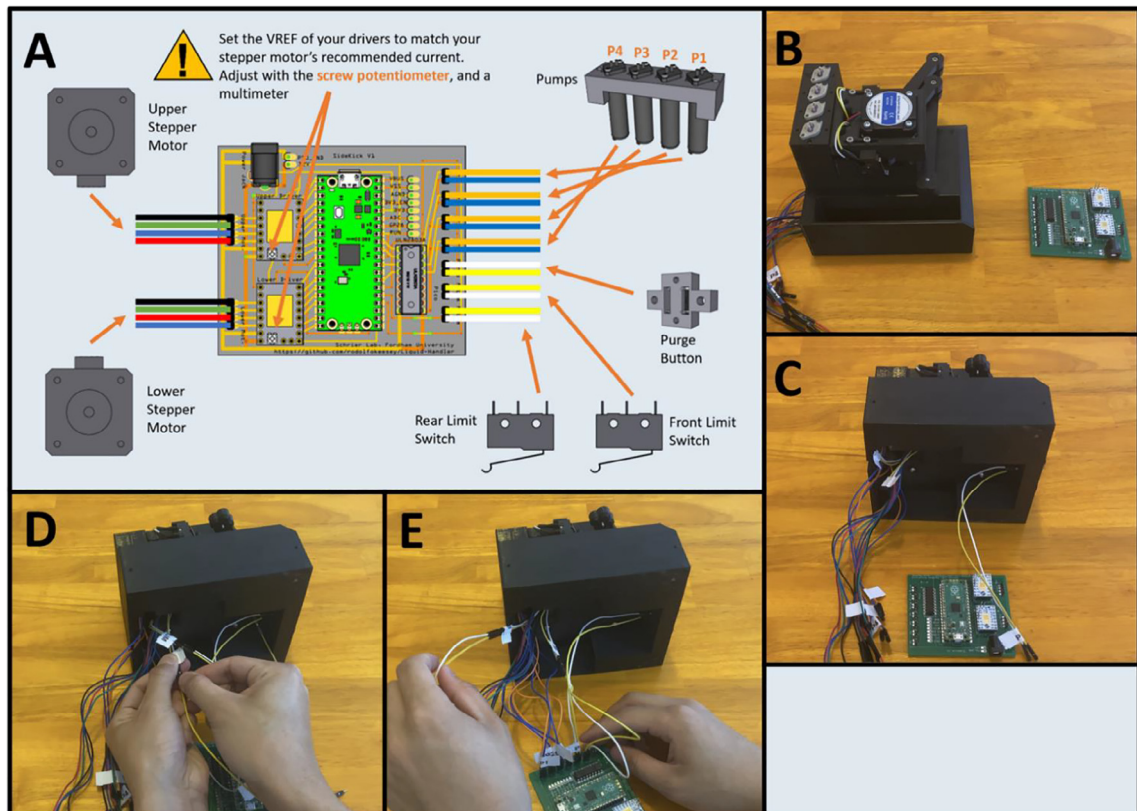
a-e: The procedure for connecting the wiring to the PCB.
